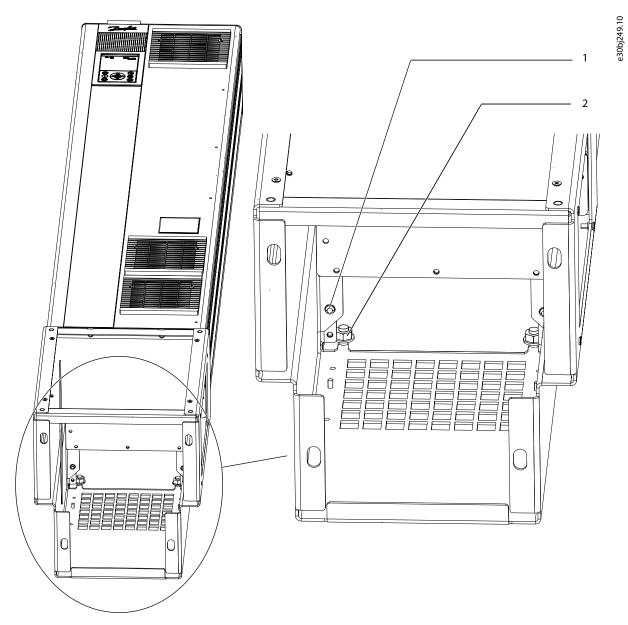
Pedestal-to-Frequency Converter Mounting Points
